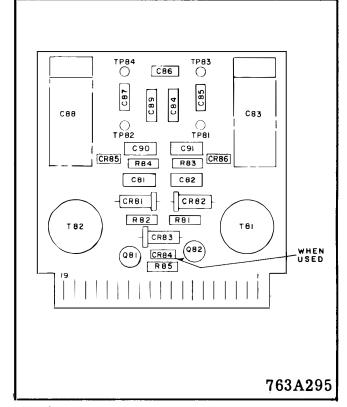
Component locations on the discriminator printed circuit board - germanium version.
